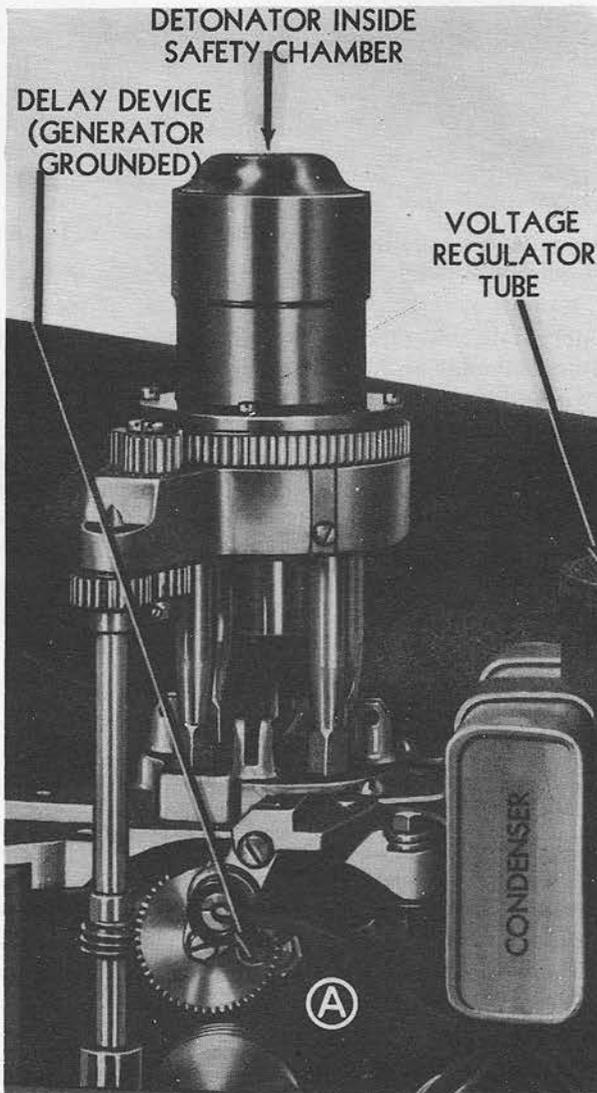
B2.—A: Exploder Mechanism Mark 6, unarmed.
